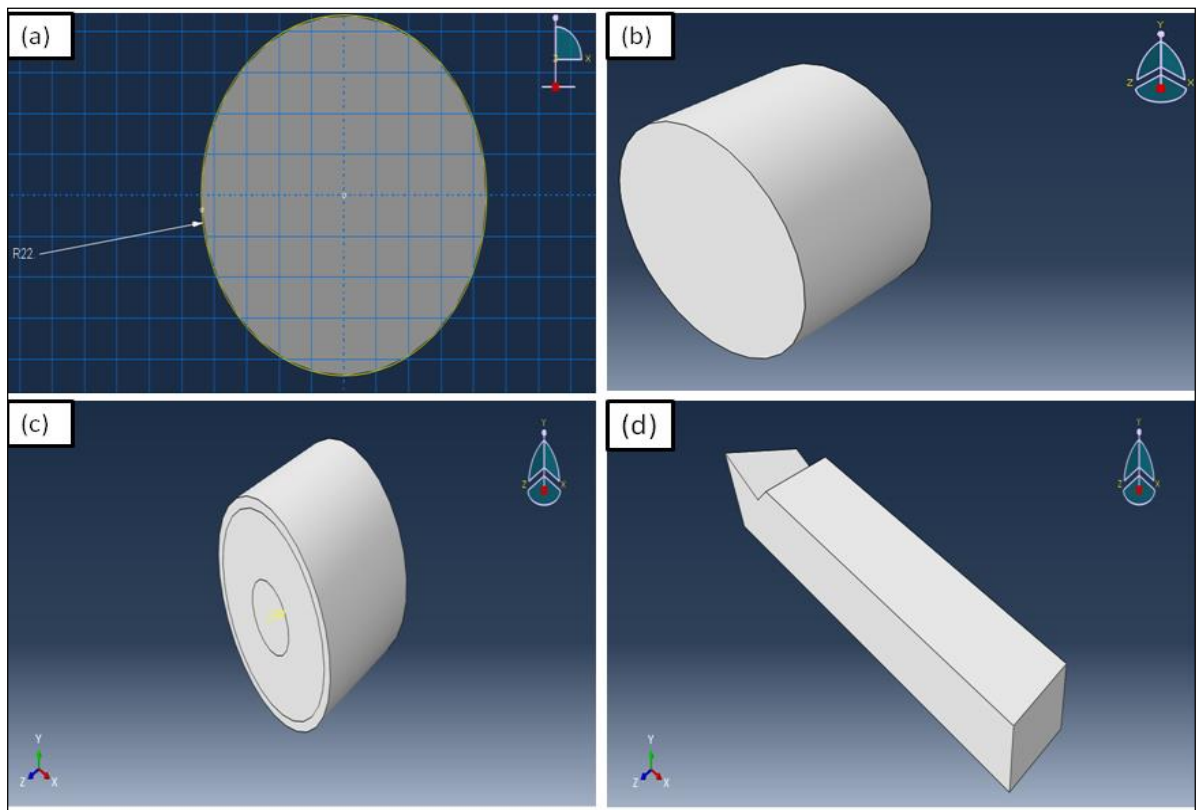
(a) Geometry of workpiece R22mm (b) Extruded cylinder workpiece 30mm (c) Partitioned regions in the work piece (d) Single point-cutting tool
